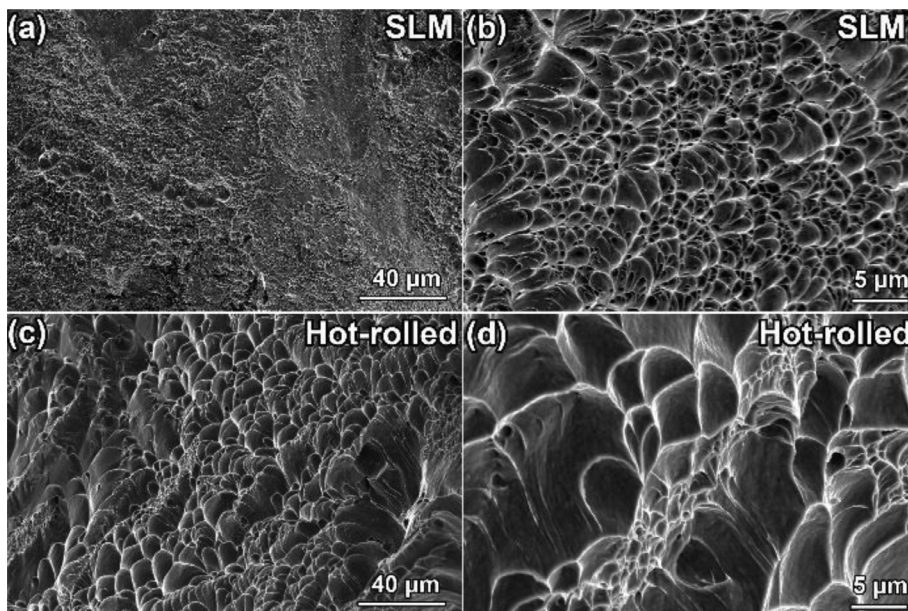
The tensile fracture surface of the (a) and (b) SLM-produced and (c) and (d) hot-rolled TLM samples. The size of the dimple in SLM-produced sample is more and finer than that of the hot-rolled counterparts.
